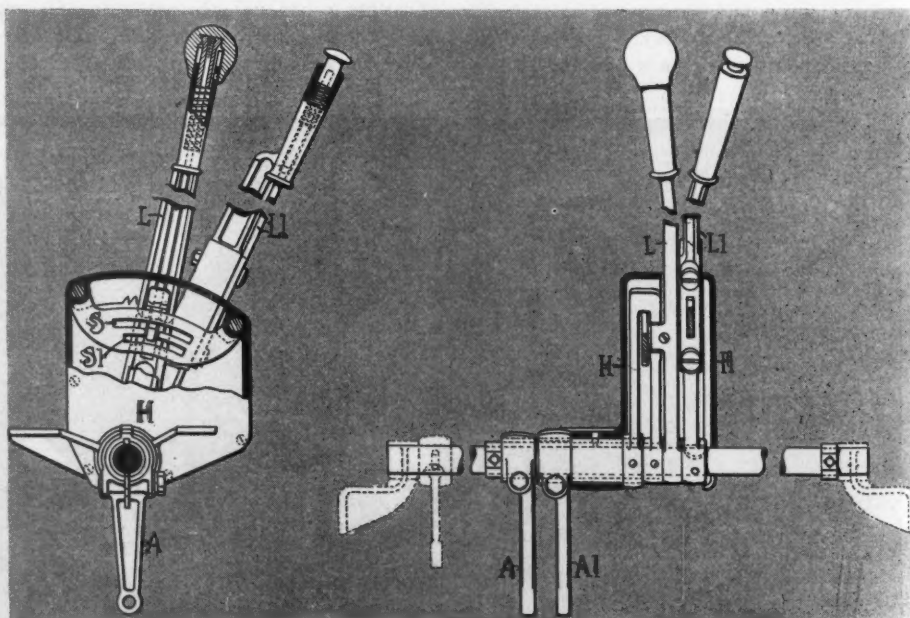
THE SINGLE-SLOT SELECTIVE GEARSHIFT SYSTEM
